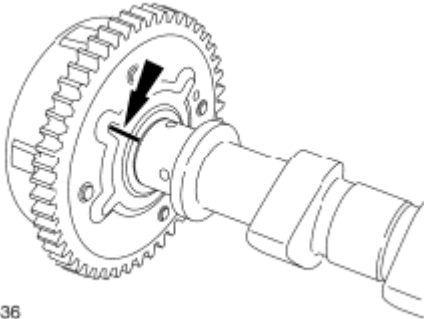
Locating Sprocket & Camshaft Reference Mark
